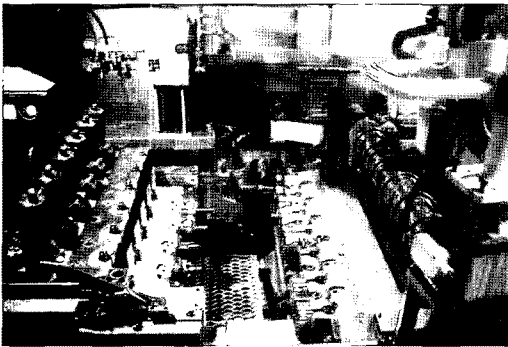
Photo. of the multi-forging machine for the unified pipe joint
